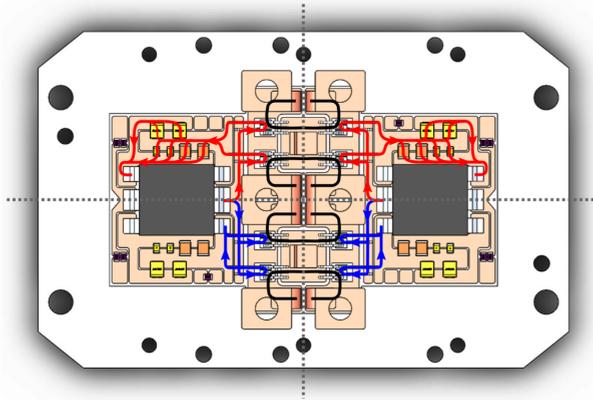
Isometric view of the layout and component descriptions of the designed CSRI power module. [Paper B]
